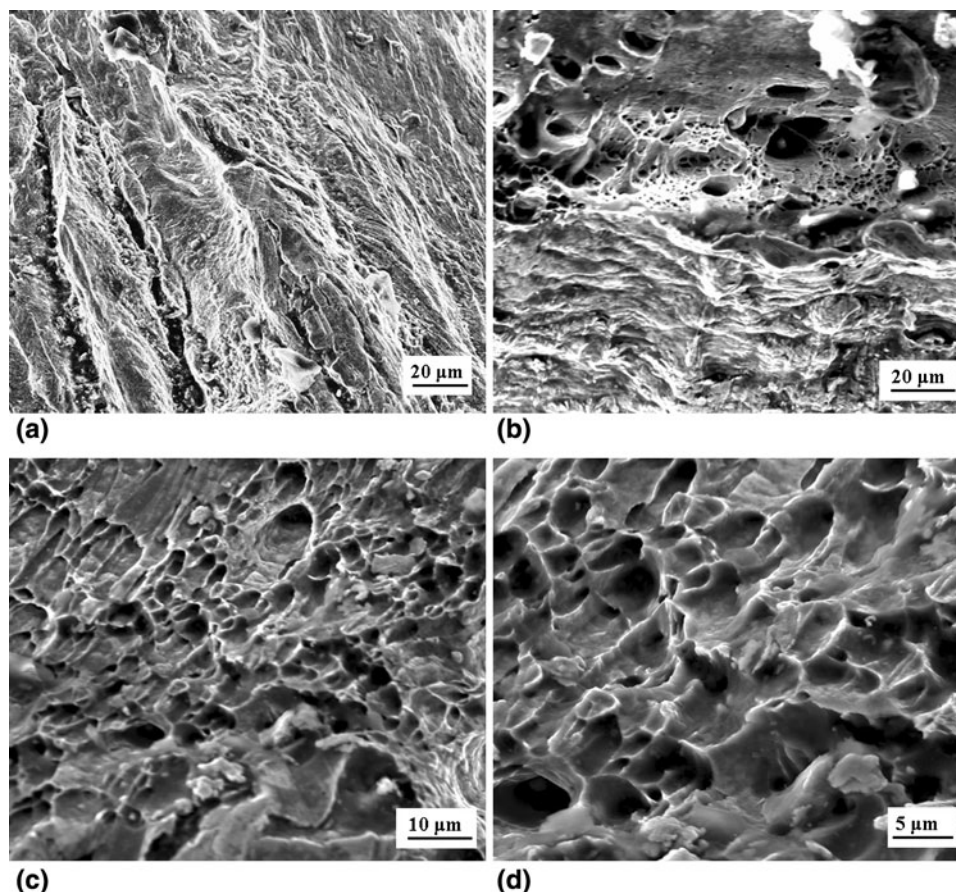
SEM fractographs of fracture surfaces of tensile specimens: (a) CR, (b) CR10, (c) CR20, and (d) CR30
